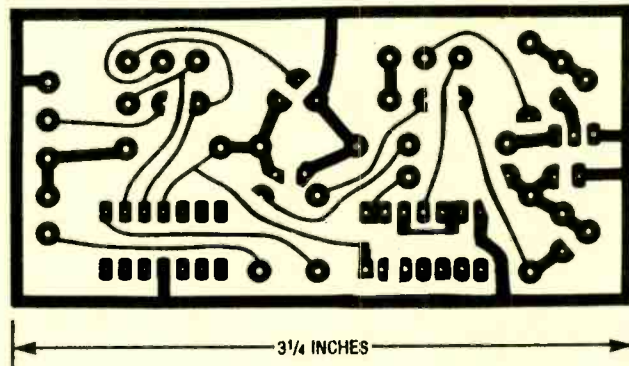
The author's prototype was assembled on a small printed-circuit board that measures about 3¼ by 1⅞ inches. A full-size template of that printed-circuit pattern is shown here.
